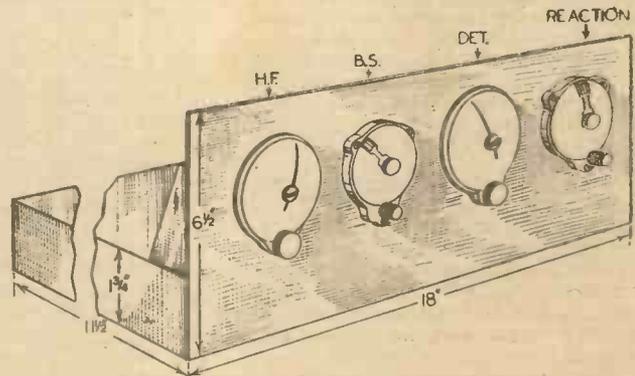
How the panel and chassis should be arranged, with full dimensions.
